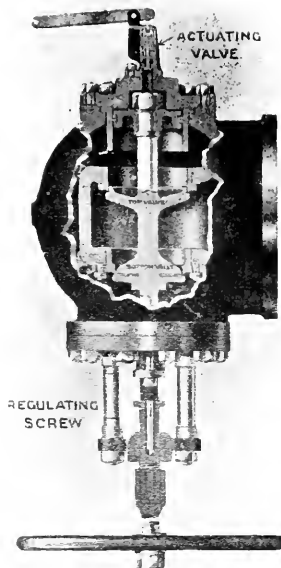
Cockburn's Double-Beat Type Regulating Valve.
